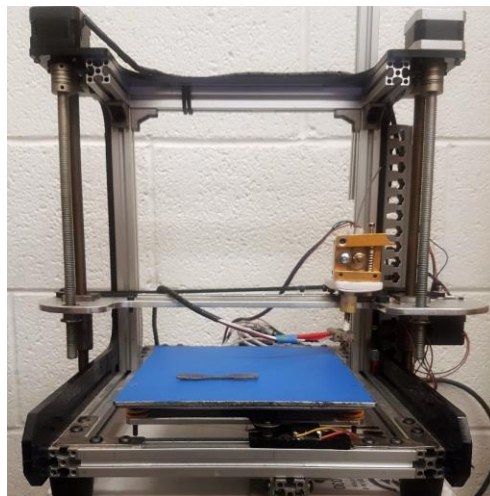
3D printer used to fabricate testing samples developed in the PNE Laboratory.
